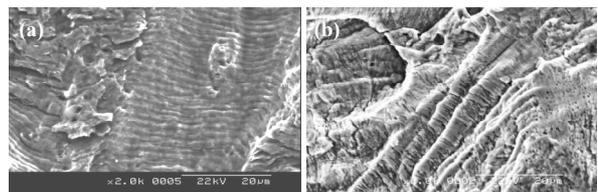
SEM fractographic of mechanical and thermal stratification method (a) Mechanical fatigue crack (b) Thermal fatigue crack
